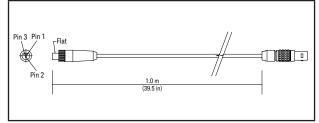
Mechanical dimension for cable option with power probe bias cable (87405C-102)
